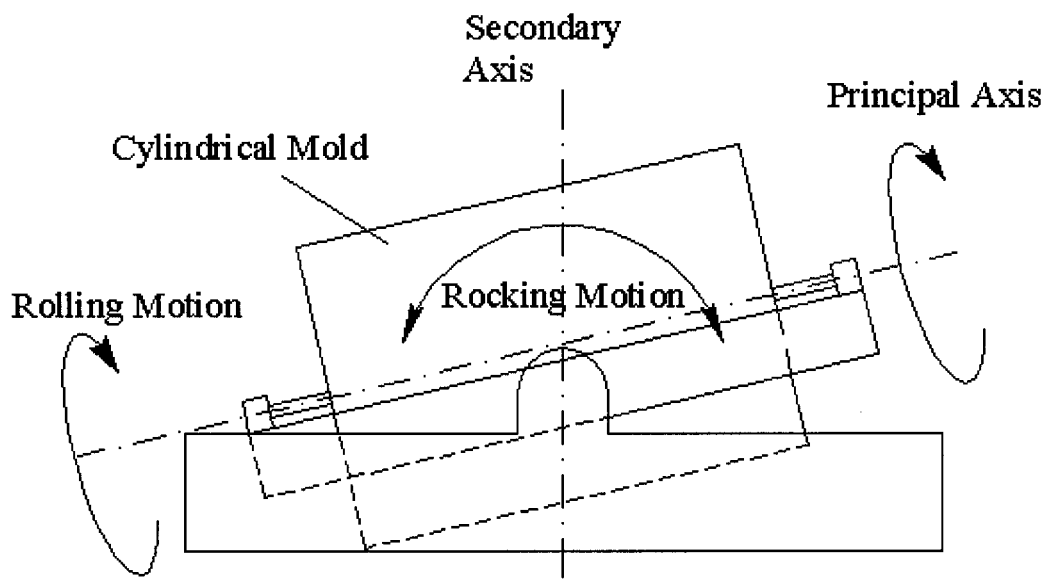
A schematic of the principle of operation of the “rock and roll” type of rotational molding machine
